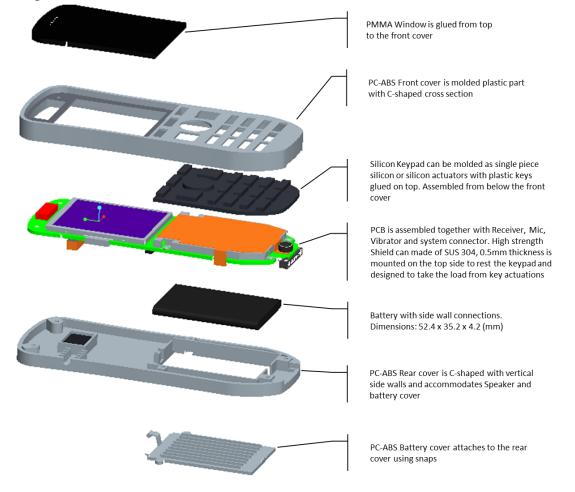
Concept (2) Foggy+Snowy exploded view with details
